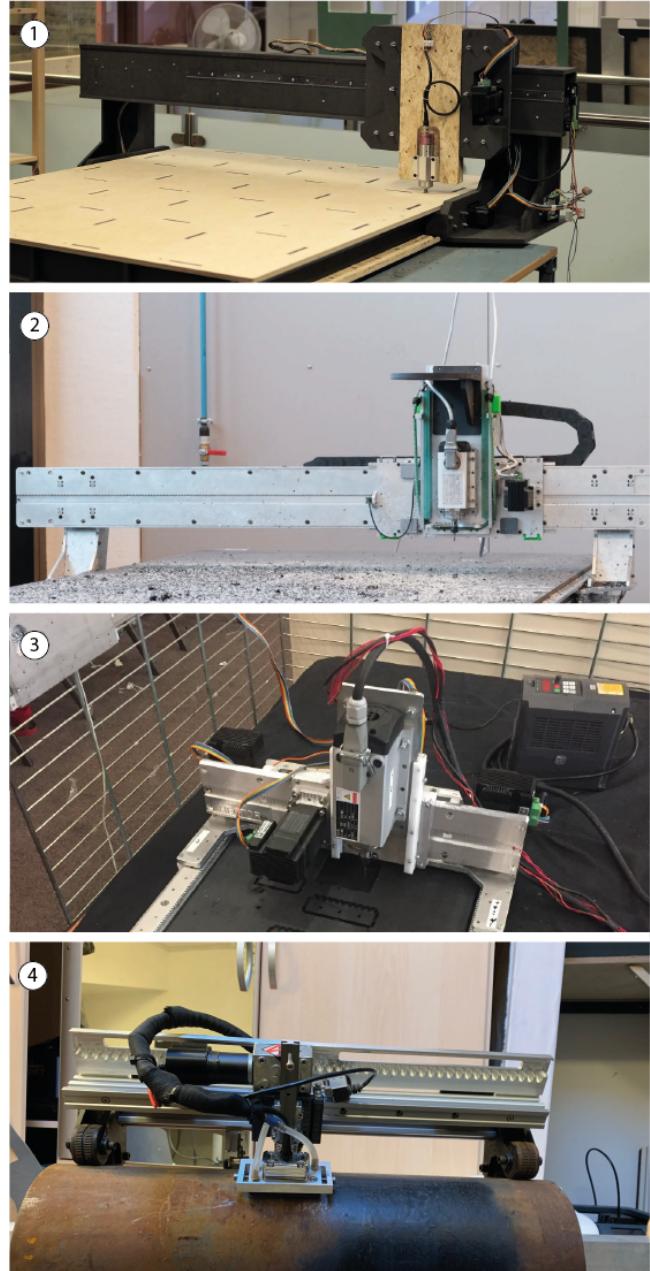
Machines 1 & 2 are two variations on milling machines. Machines 3 & 4 are nontraditional, where Machine 3 is a milling machine designed to fit into a suitcase and machine 4 semi-autonomous pipe inspection robot. All designs were built in makerspaces.
